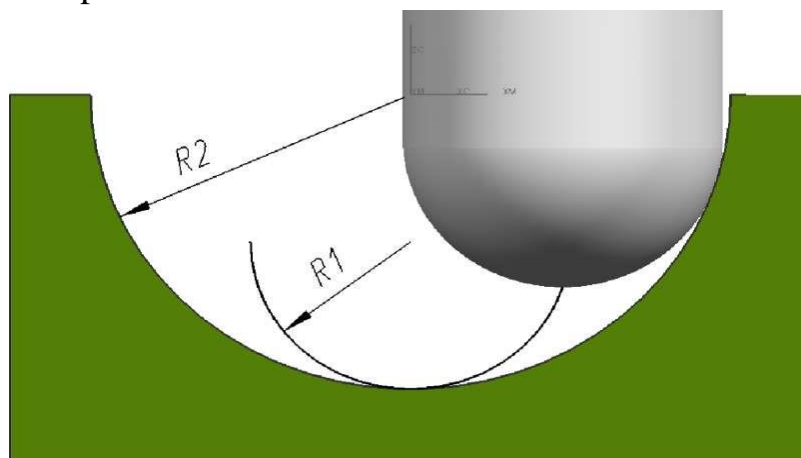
Spherical surface programming R 1- radius of the cutter trajectory, R 2- radius of the machined surface.
